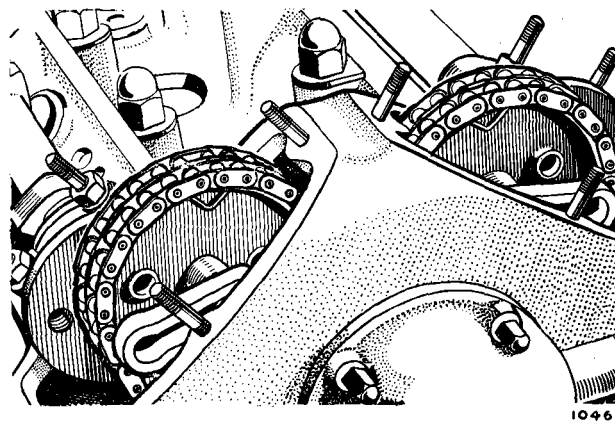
Showing the camshaft sprockets disconnected from the camshafts.
